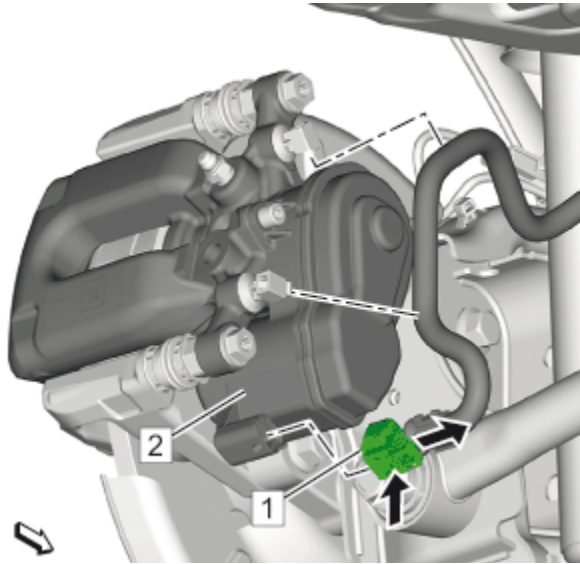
Brake Caliper Assembly And Lectrical Connector
